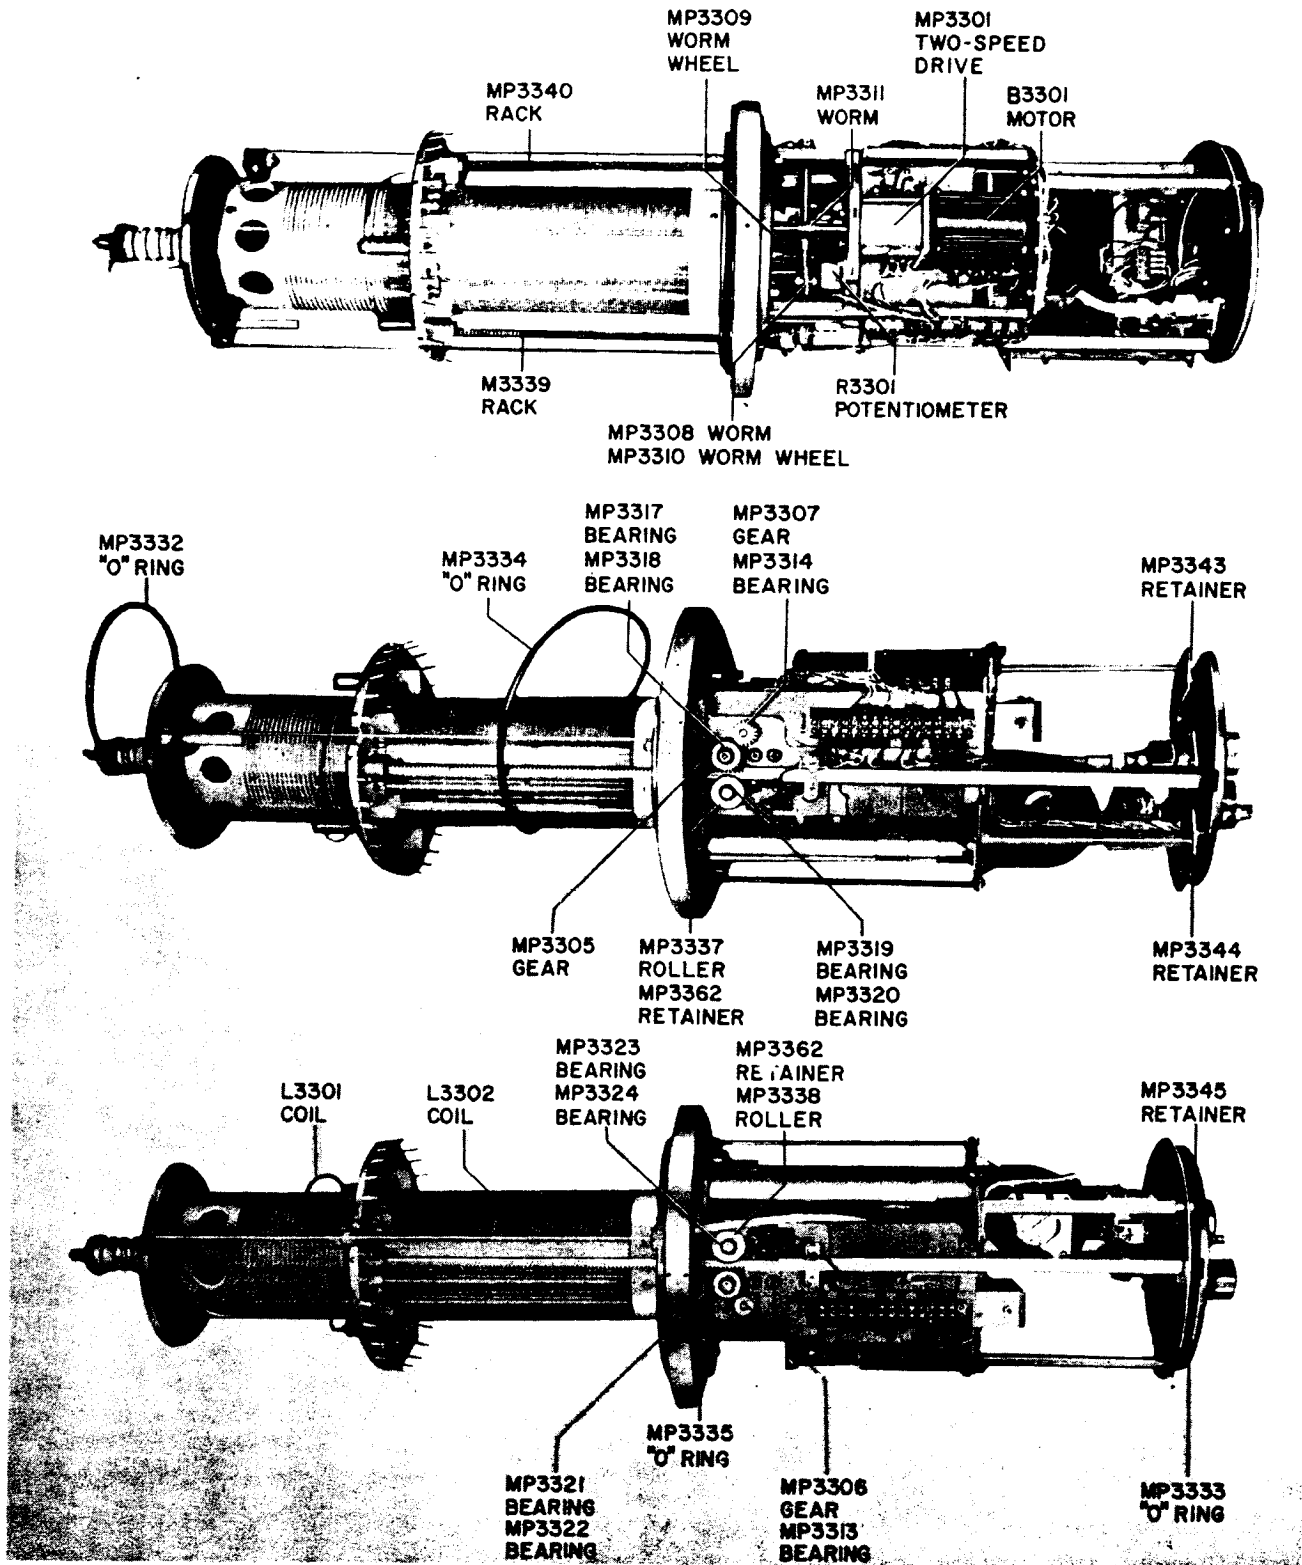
Radi Frequency Tuner TN-345/WRT-1, Replacement of Internal Parts
